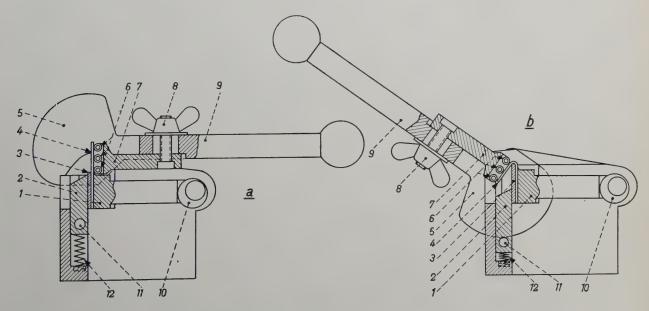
Structural design: I clamping piece; 2 support bar; 3 radius plate; 4 test specimen; 5 cam, which depresses support bar; 6 rollers, mounted in thrust block 7, which is fixed by wing-nut 8 to lever 9; the excentric 10 serves to hold clamping piece against specimen; 11 pin by which the support bar is depressed against spring 12. a) Machine ready for operation after insertion of test specimen; b) after bending through 145° .
